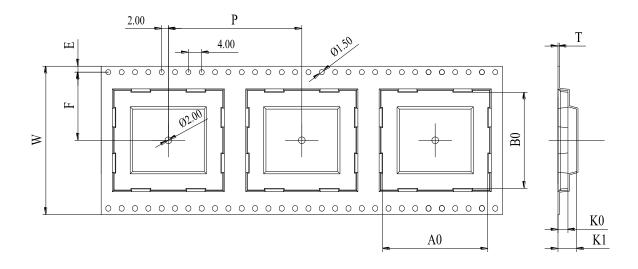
Carrier Tape Dimension Drawing (Unit: mm)
